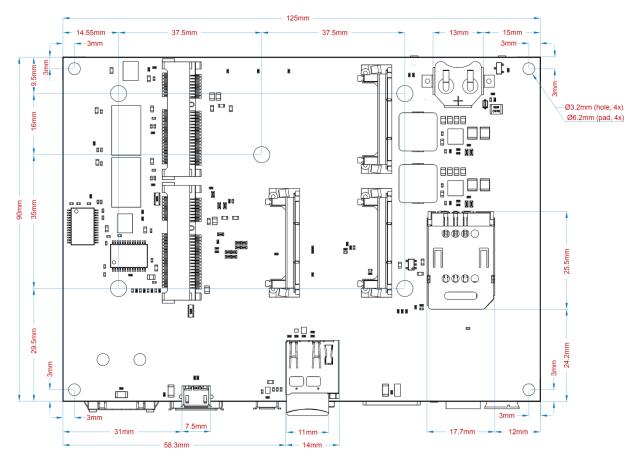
Ixora Carrier Board Mechanical Drawing - Bottom Side (All dimensions in millimeter)
